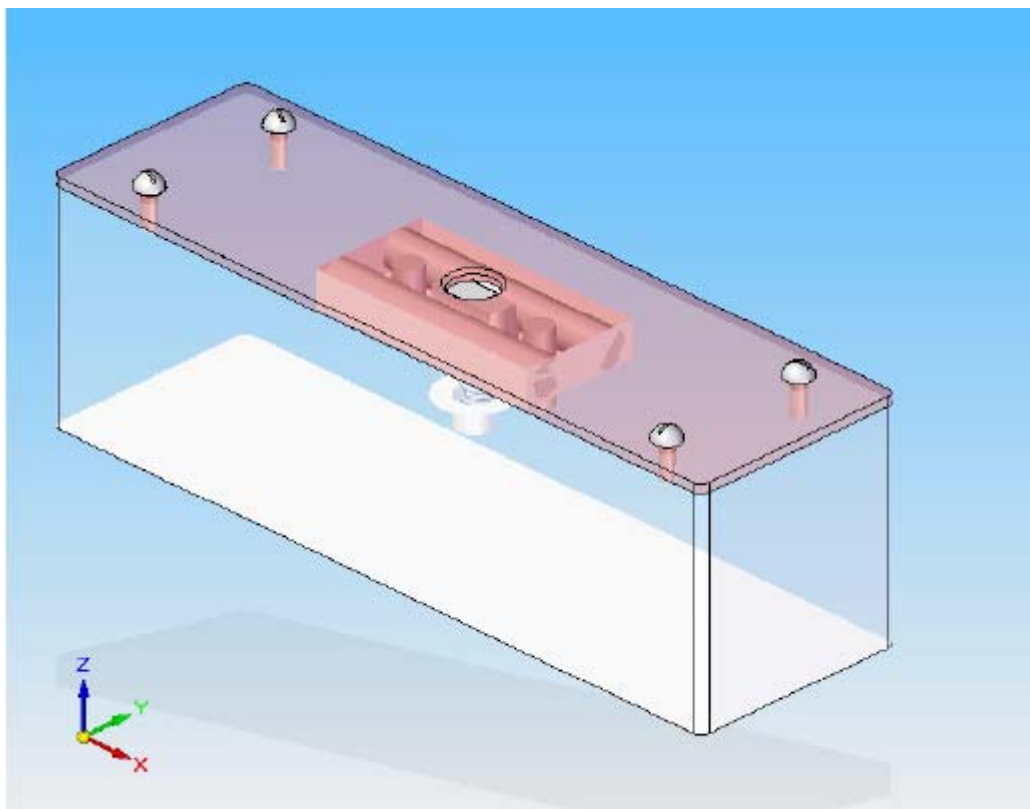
Design Concept for Medium O-ring Fixture
